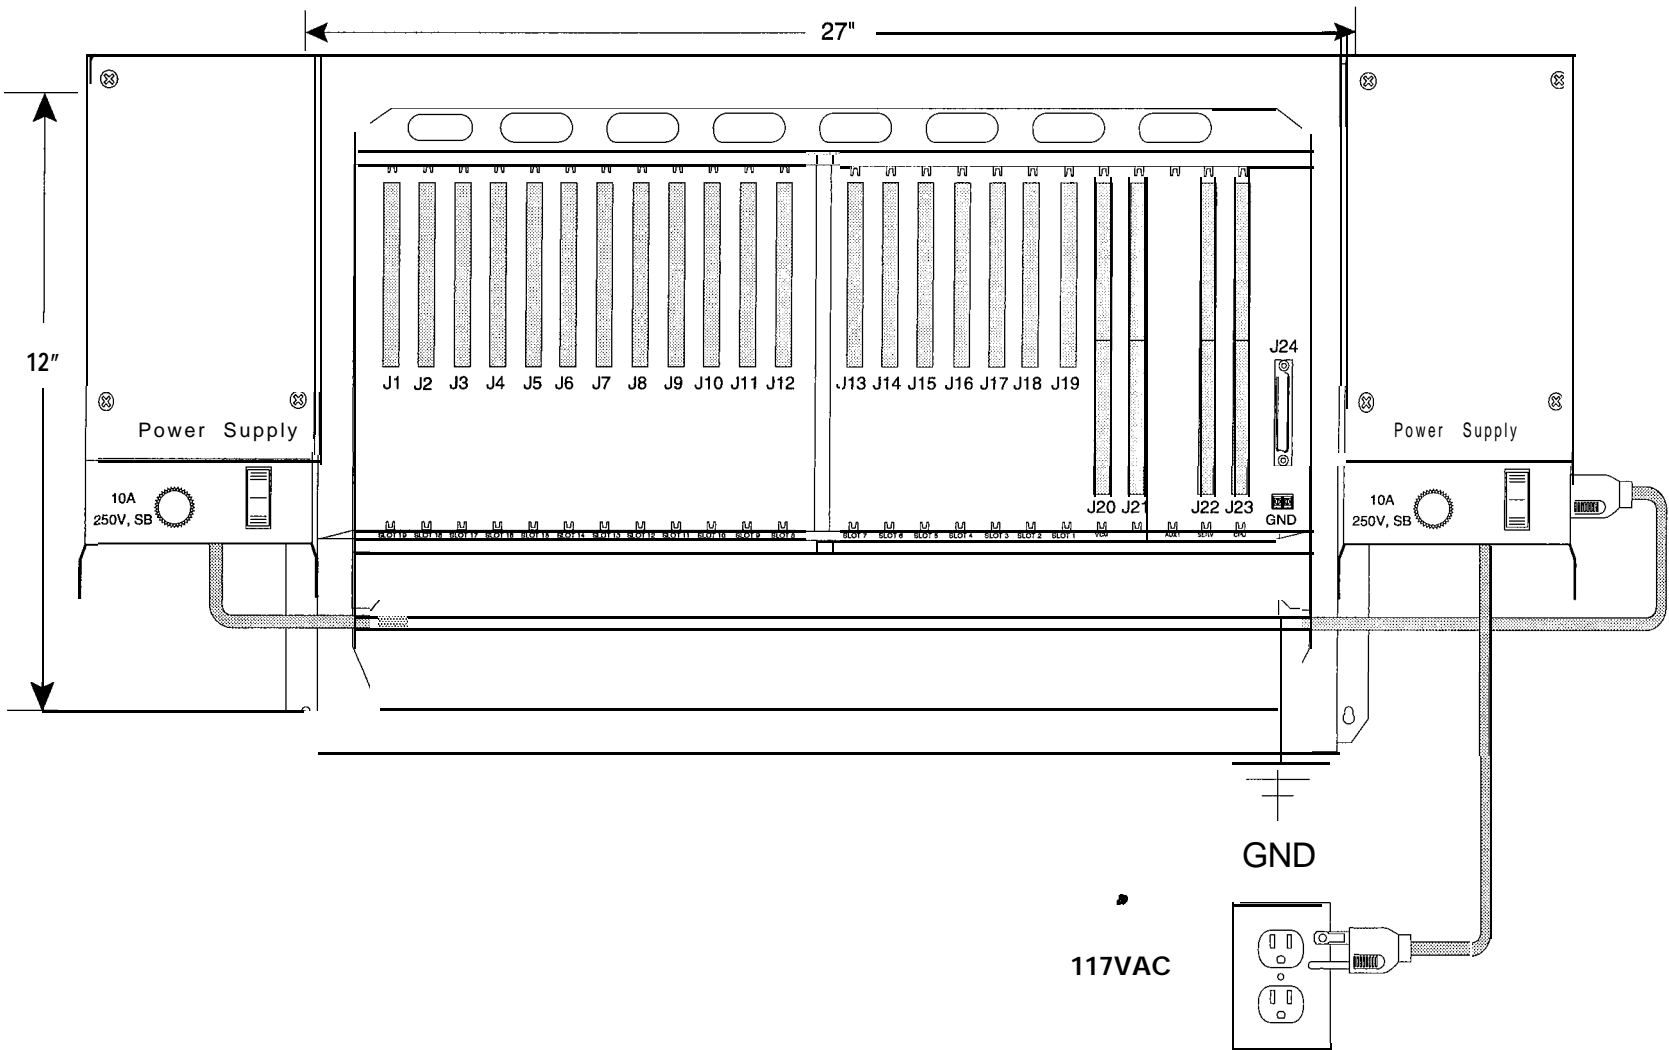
Basic KSU Cabinet Mounting Dimensions
